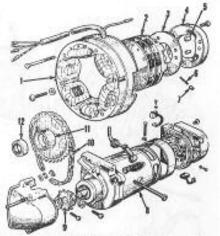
Exploded view of AC generator (alternator) and starter drive parts.
